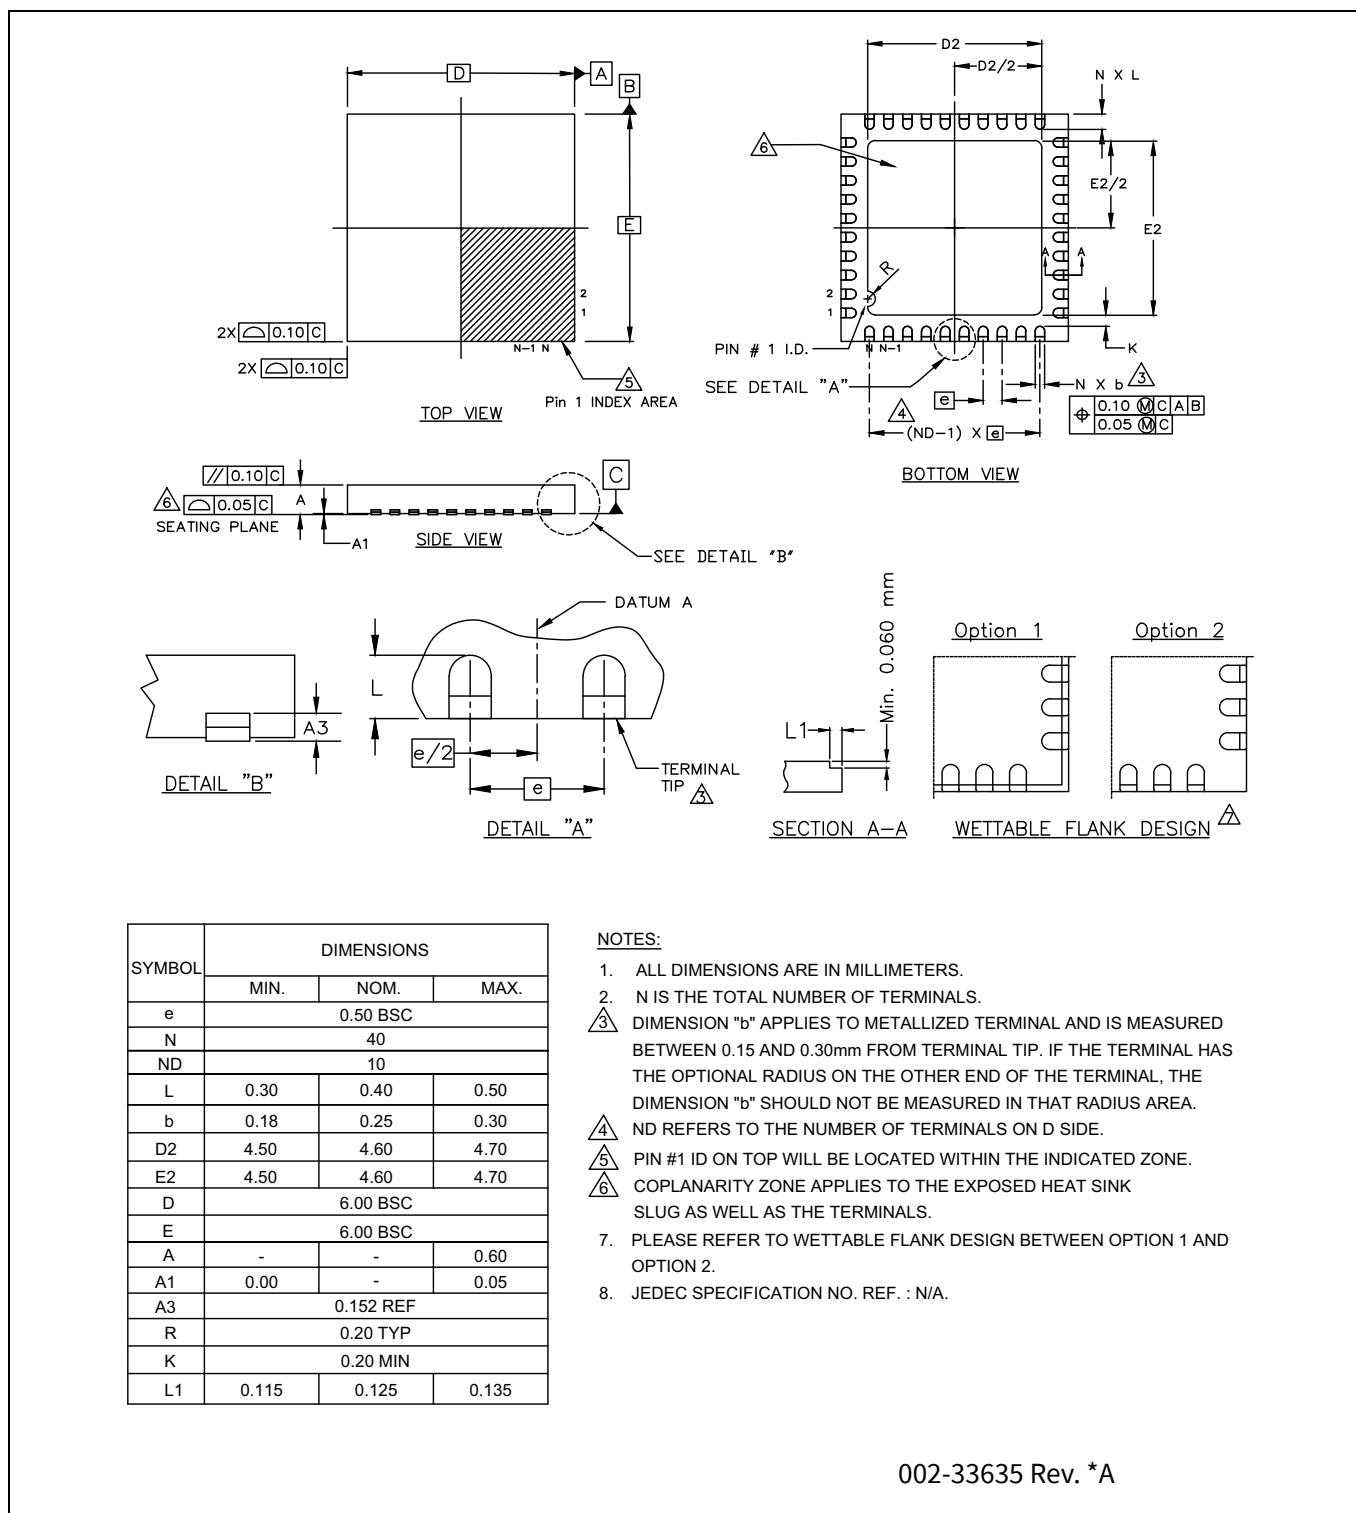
40 LEAD QFN ((6.0 × 6.0 × 0.6 mm) LD40D 4.60 × 4.60 mm EPAD (Wettable flank) package outline, 002-33635
